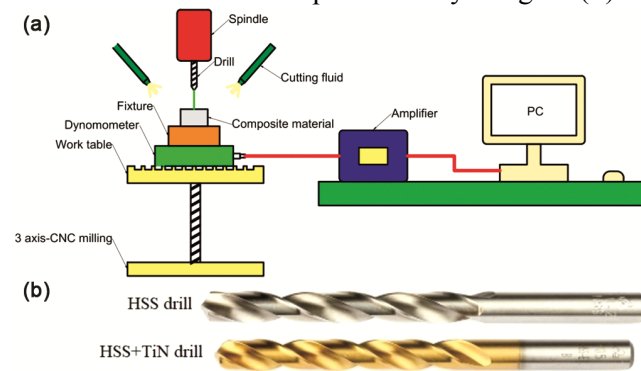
(a) Drilling set-up, (b) drill bits used
